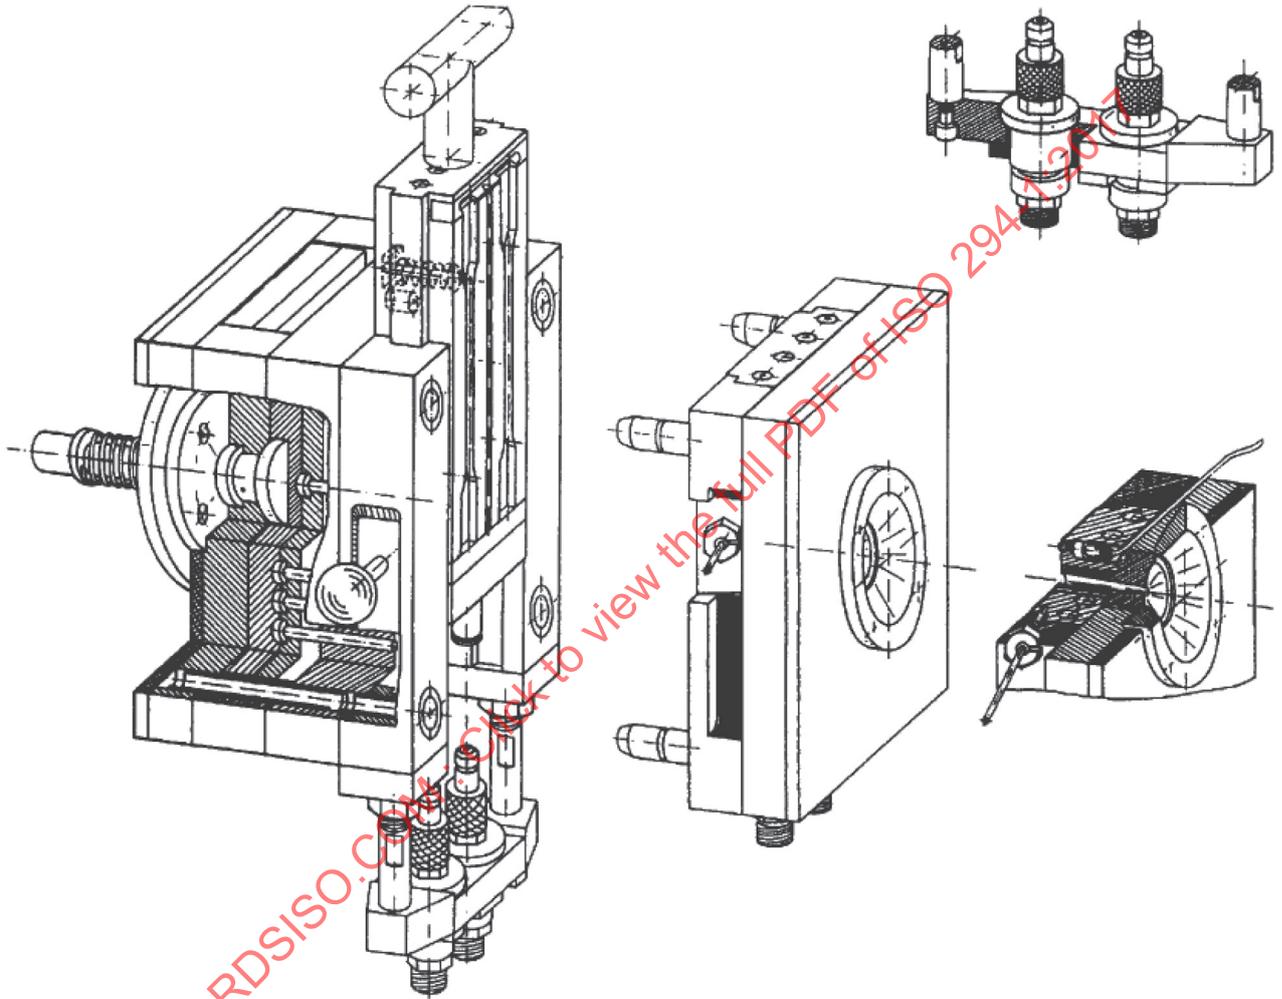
Exploded view of an injection mould with an interchangeable two-cavity plate for an ISO 20753 type A1 mould
